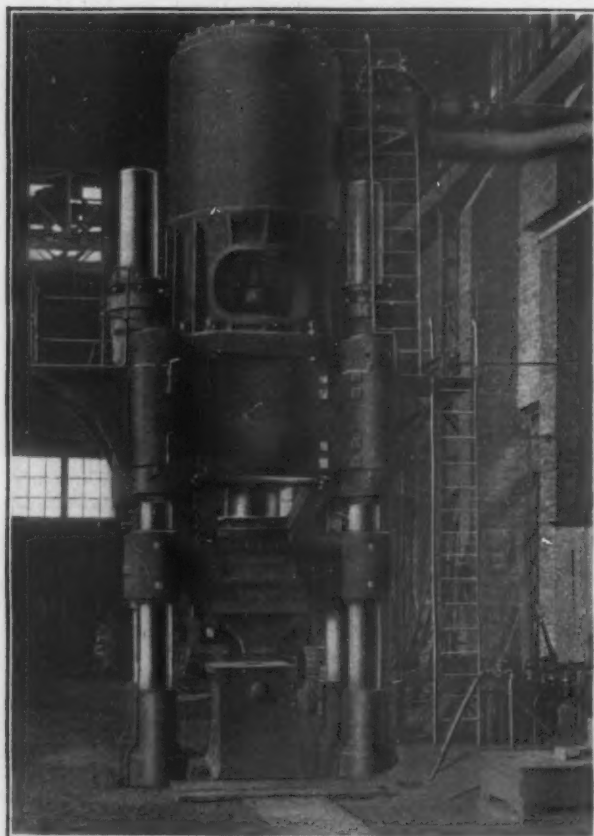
The Haniel & Lueg Steam Hydraulic Forging Press Built by the Mesta Machine Company, Pittsburgh, Pa.
